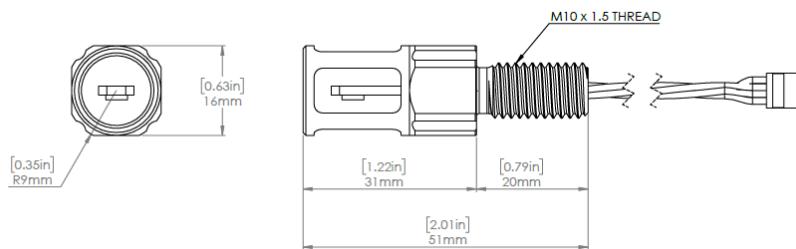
Figure X: Mechanical dimensions of the temperature sensor housing and threaded body
